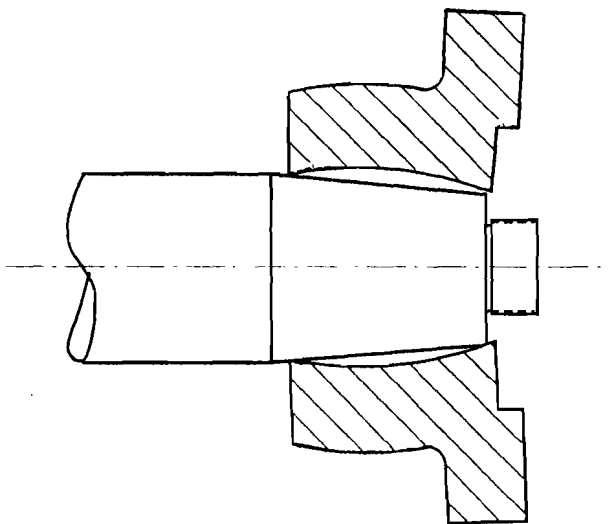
Hub Dilation with Hydraulic Pressure. Note: The barrel-type distortion is typical of sealless hubs.
